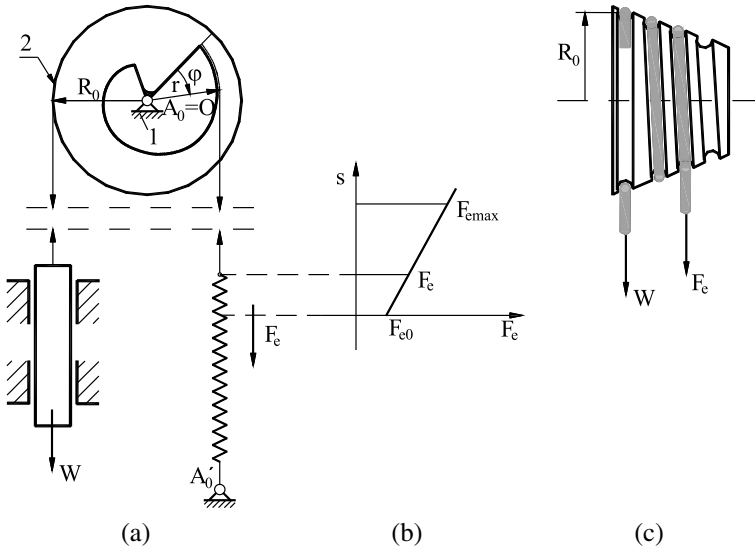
Self-balanced measuring head of a coordinate measuring device
